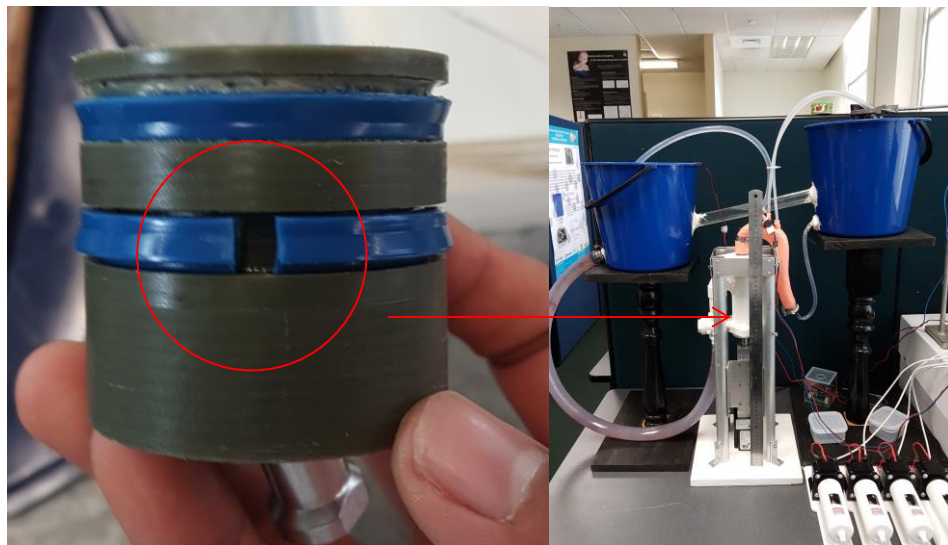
Splitting of the O-ring inside the piston drive of Drummond's left ventricle mechanism.
